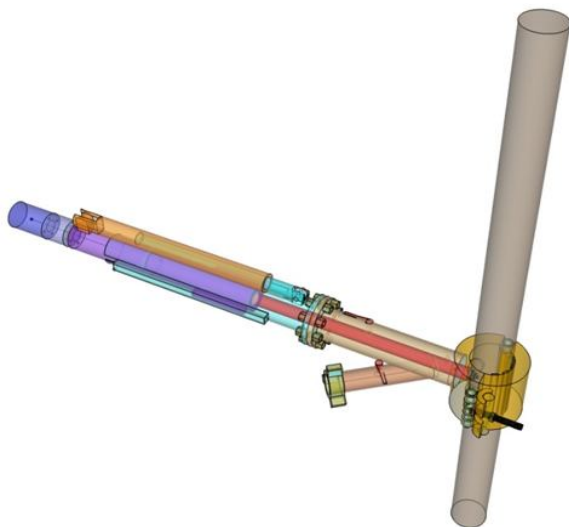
Internal view of a new model of a device for drilling, fastened by a coupling on a drilled tube [6]
